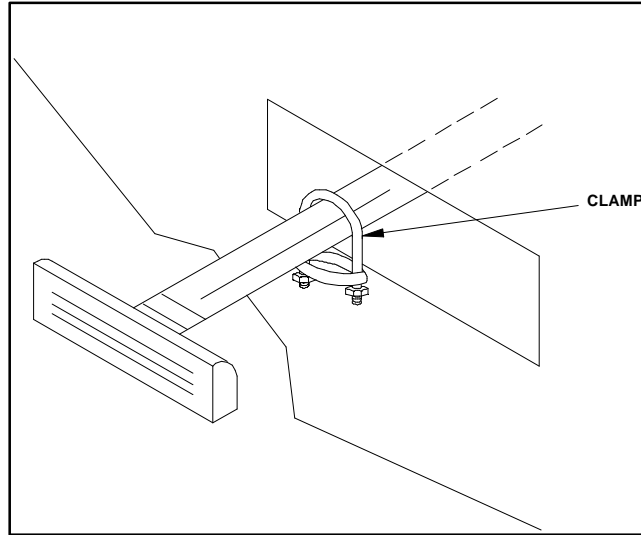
PARKING BRAKE CLAMP ATTACHMENT
